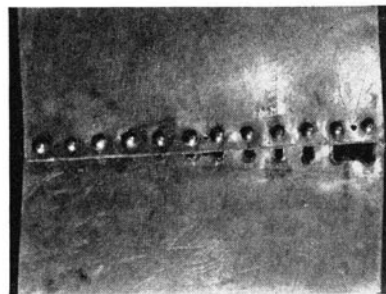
FAILURE BY TEARING OUT OF RIVETS TO THE EDGE OF INSIDE SHEET, SPECIMEN CB-31
